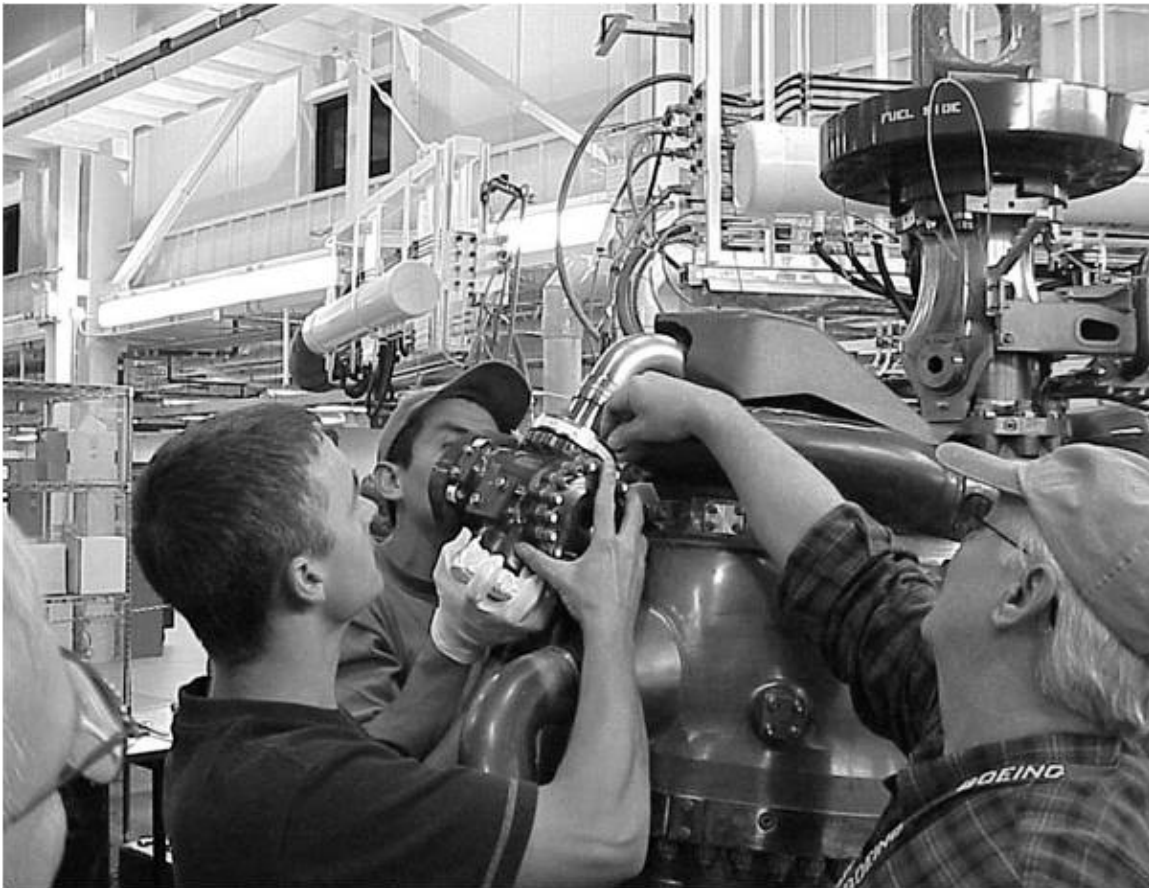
Technicians attach the fuel preburner oxidizer valve and the fuel preburner oxidizer valve assembly to the SSME, SSMEPF, camera facing southwest, date unknown.
